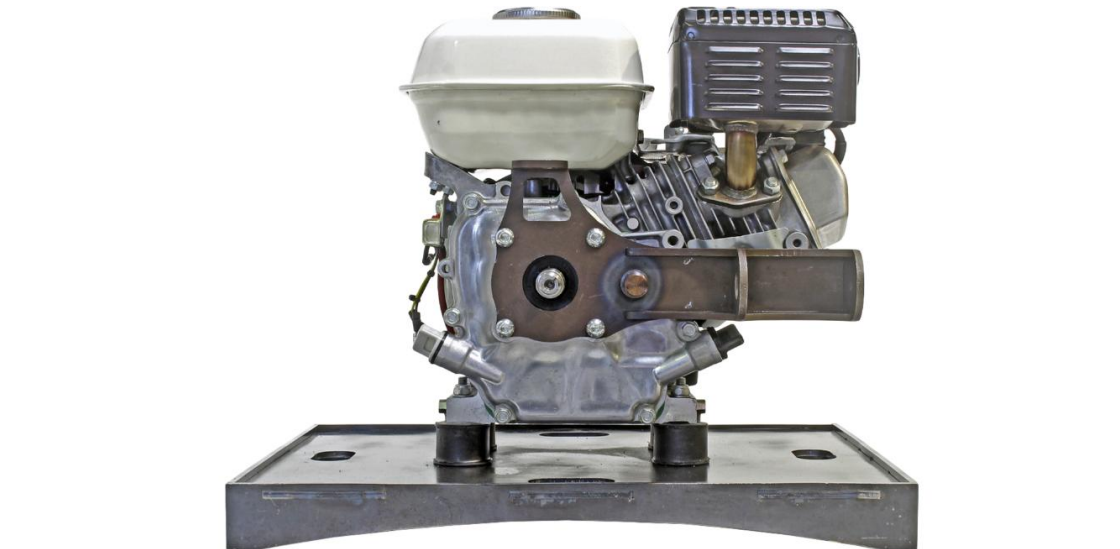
Fully assembled structure of the mechanism with the intermediary shaft, mounted on the Honda® GX 120 engine.
